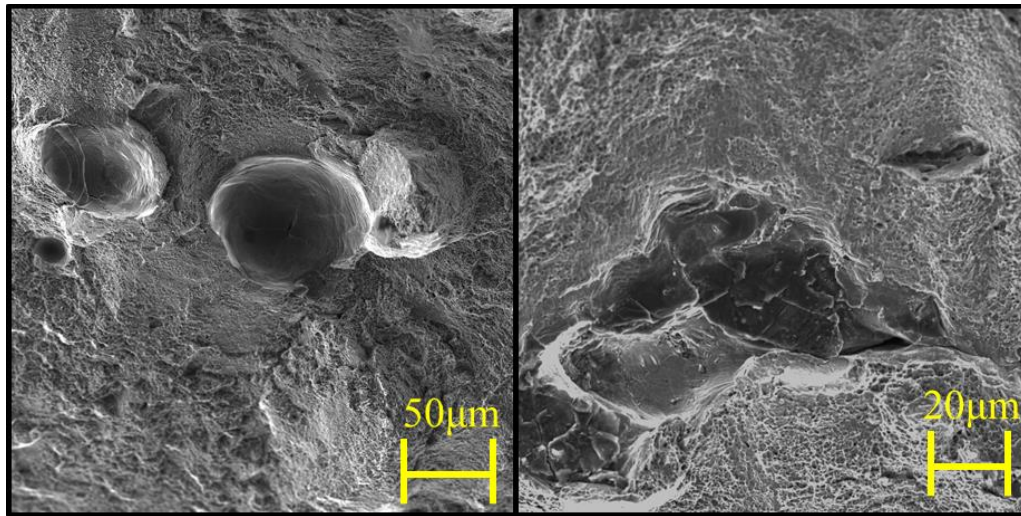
Fractography of as-printed SLM sample 20A/B
